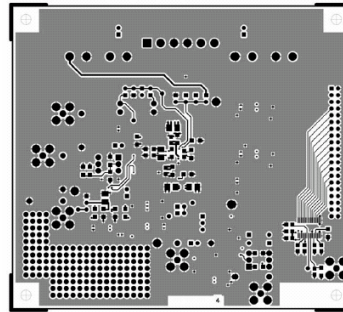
TSSOP Evaluation Board Layout, Secondary Side
